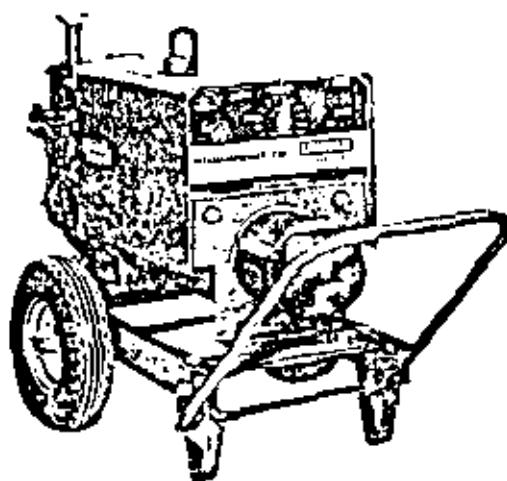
A typical engine-driven power source that supplies AC current for welding or power for lights and tools.
